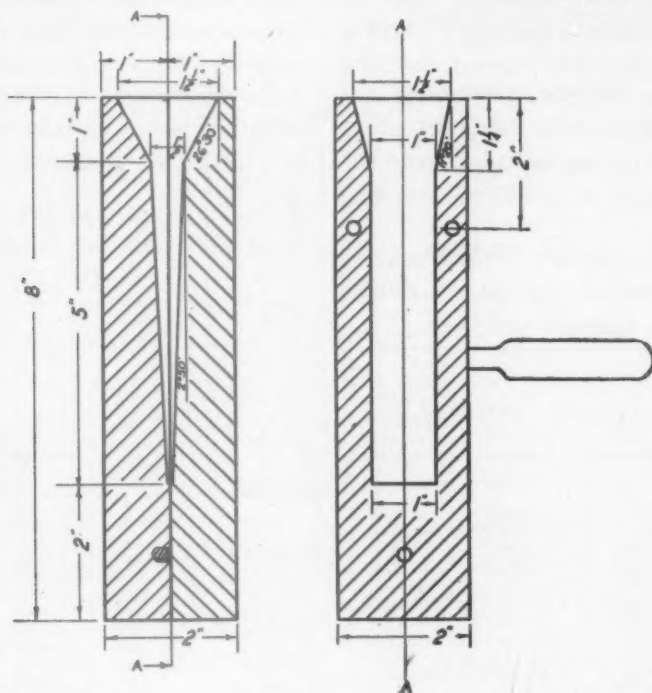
DESIGN OF WEDGE MOLD. CONSTRUCTED FROM A COPPER BAR.
